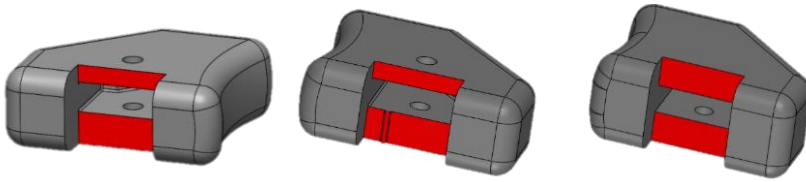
LH and RH carrier charging handle covers (8 mm thick) with an asymmetrical mounting groove for the charging handle in the MSBS Grot Version A0 (left image) and the single universal carrier charging handle cover (9.5 mm thick) with the symmetrical mounting groove in the MSBS Grot Version A1
